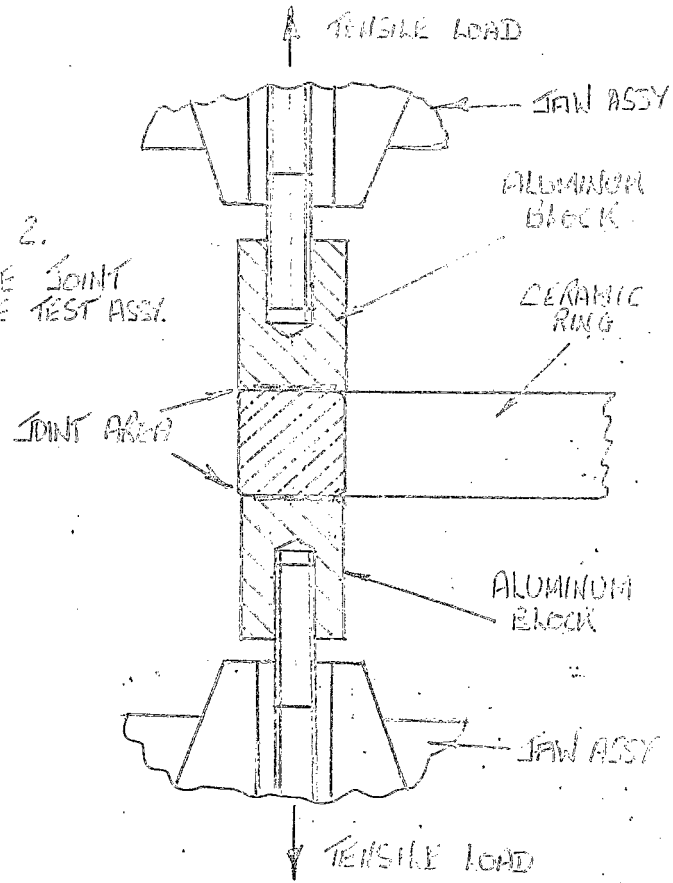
SINGLE JOINT TENSILE TEST ASSY
